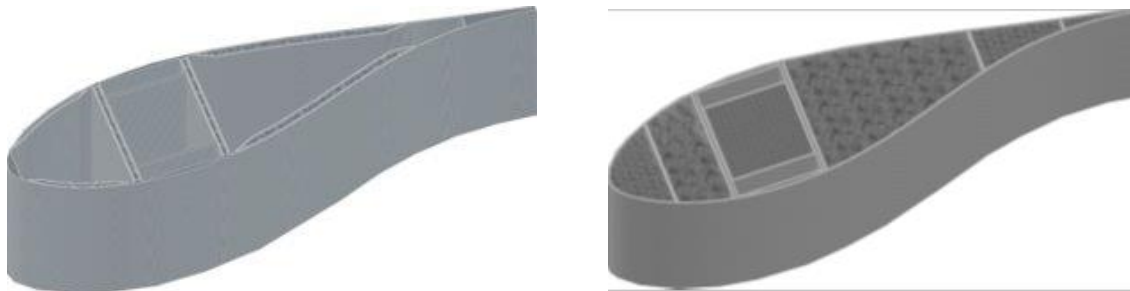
Blade using AM with separate parts (a) and fully exploiting AM (b)
